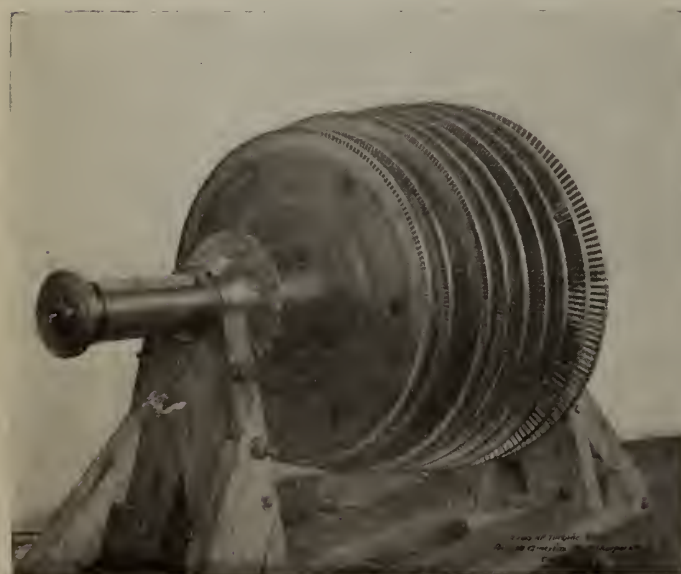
Rotor of 2,100 h.p. Condensing Steam Turbine.
